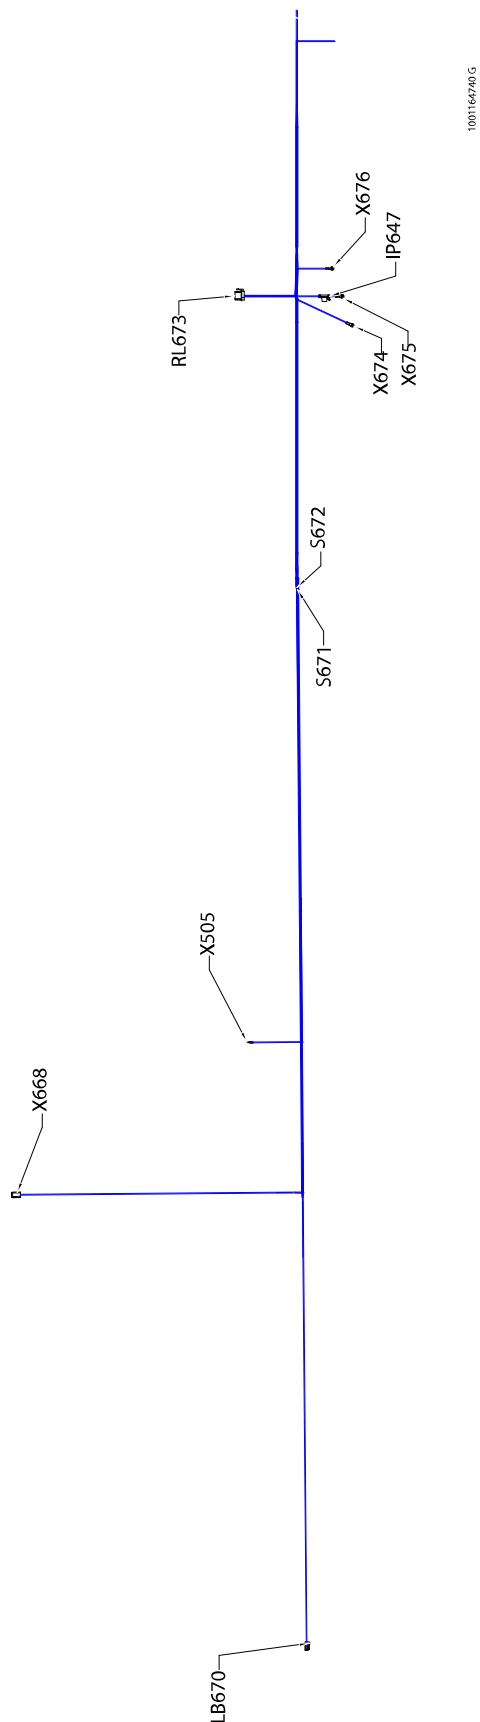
Chassis Head and Tail Lights Harness - Sheet 2 of 5
